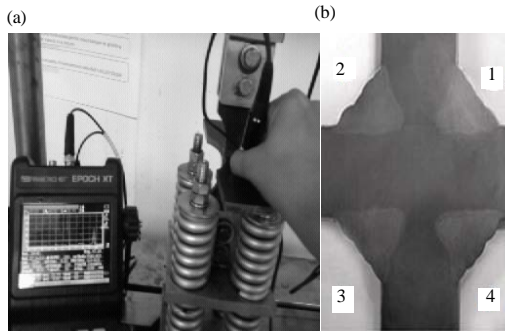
Testing procedure: a) Ultrasound measurement Scan A and b) Fillet identification on a cruciform test piece
